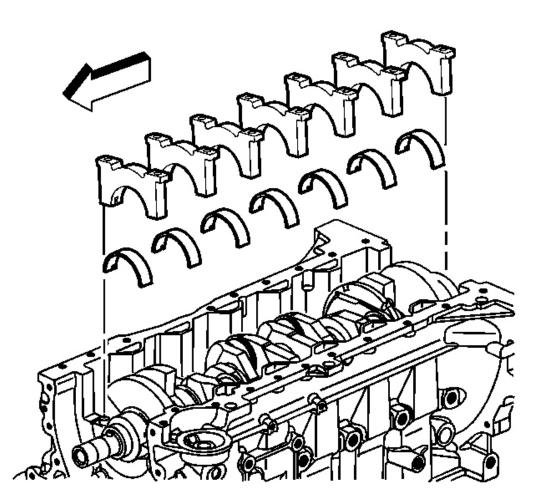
View Of Crankshaft Main Bearing Caps & Lower Bearings Courtesy of GENERAL MOTORS CORP.
